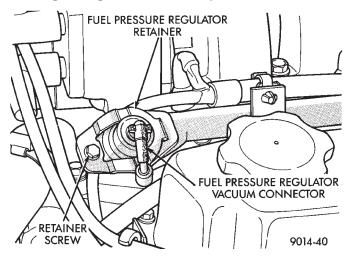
Fuel Pressure Regulator Vacuum Connection
